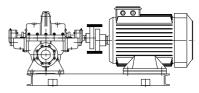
Parallel sliding error in vertical plane and adjustment.
